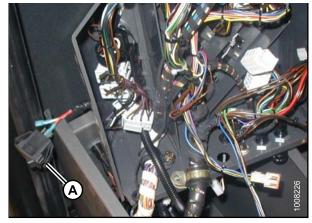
Back of Console (Rocker Switch Shown before Placement)
